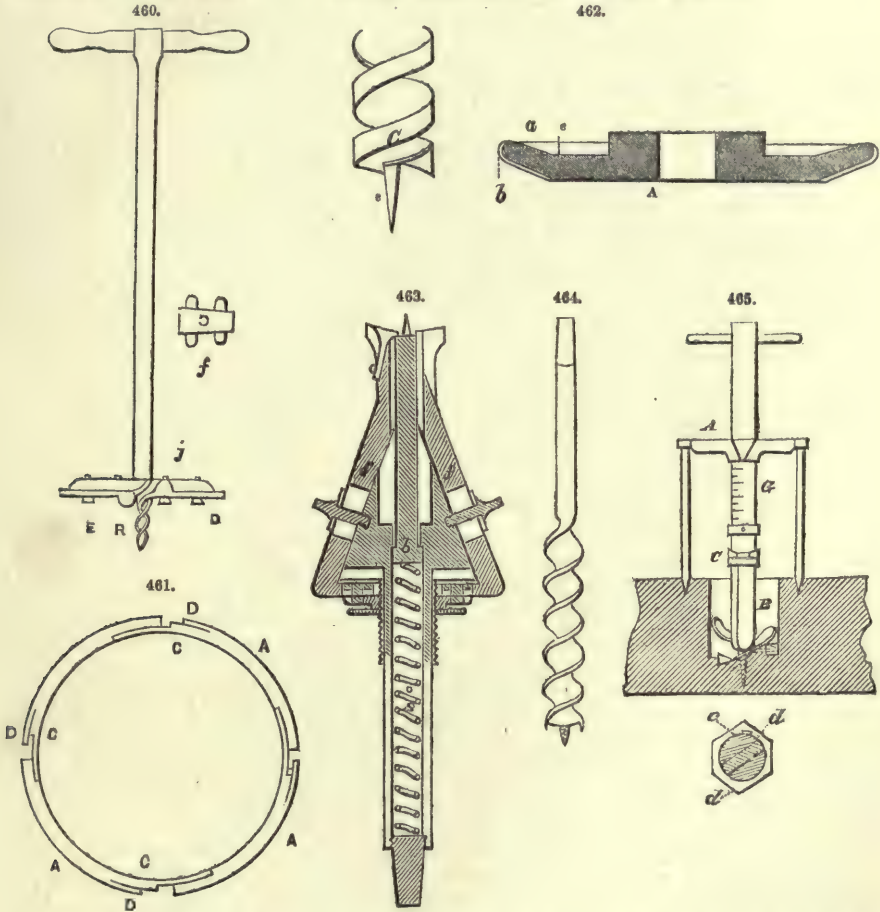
shows a tool for finishing augers, invented by R. Jennings. It consists of a wheel or burr, having a bevelled surface a on one side, and a semicircular edge, corrugated to form a series of cutters b, which have a radial or nearly radial position, and extend from the inner edge of a to the outer edge of the same. These cutters are placed entirely around the semicircular periphery of the wheel, and act in combination with the concave surface c at the opposite side of the wheel.
